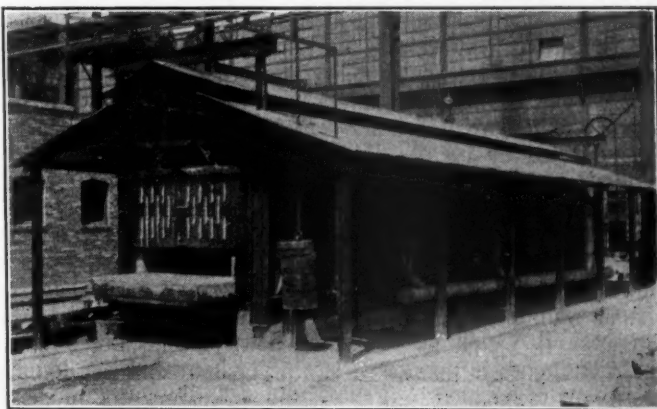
DeRemer-Blatchford Car Bottom Furnace for Annealing Locomotive Frames
